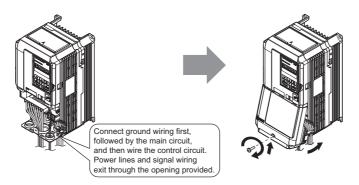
Reattaching the Terminal Cover on an IP20/NEMA Type 1 Enclosure Drive
